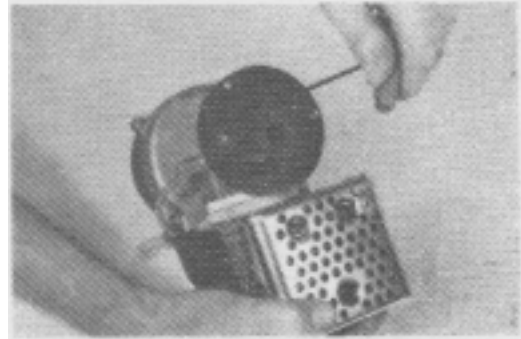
Remove four mounting screws from reed plate and carburetor mount.
